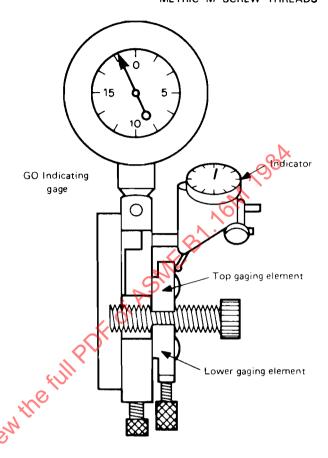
INDICATING GAGES — HELICAL PATH ATTACHMENT USED WITH GO TYPE INDICATING GAGE
